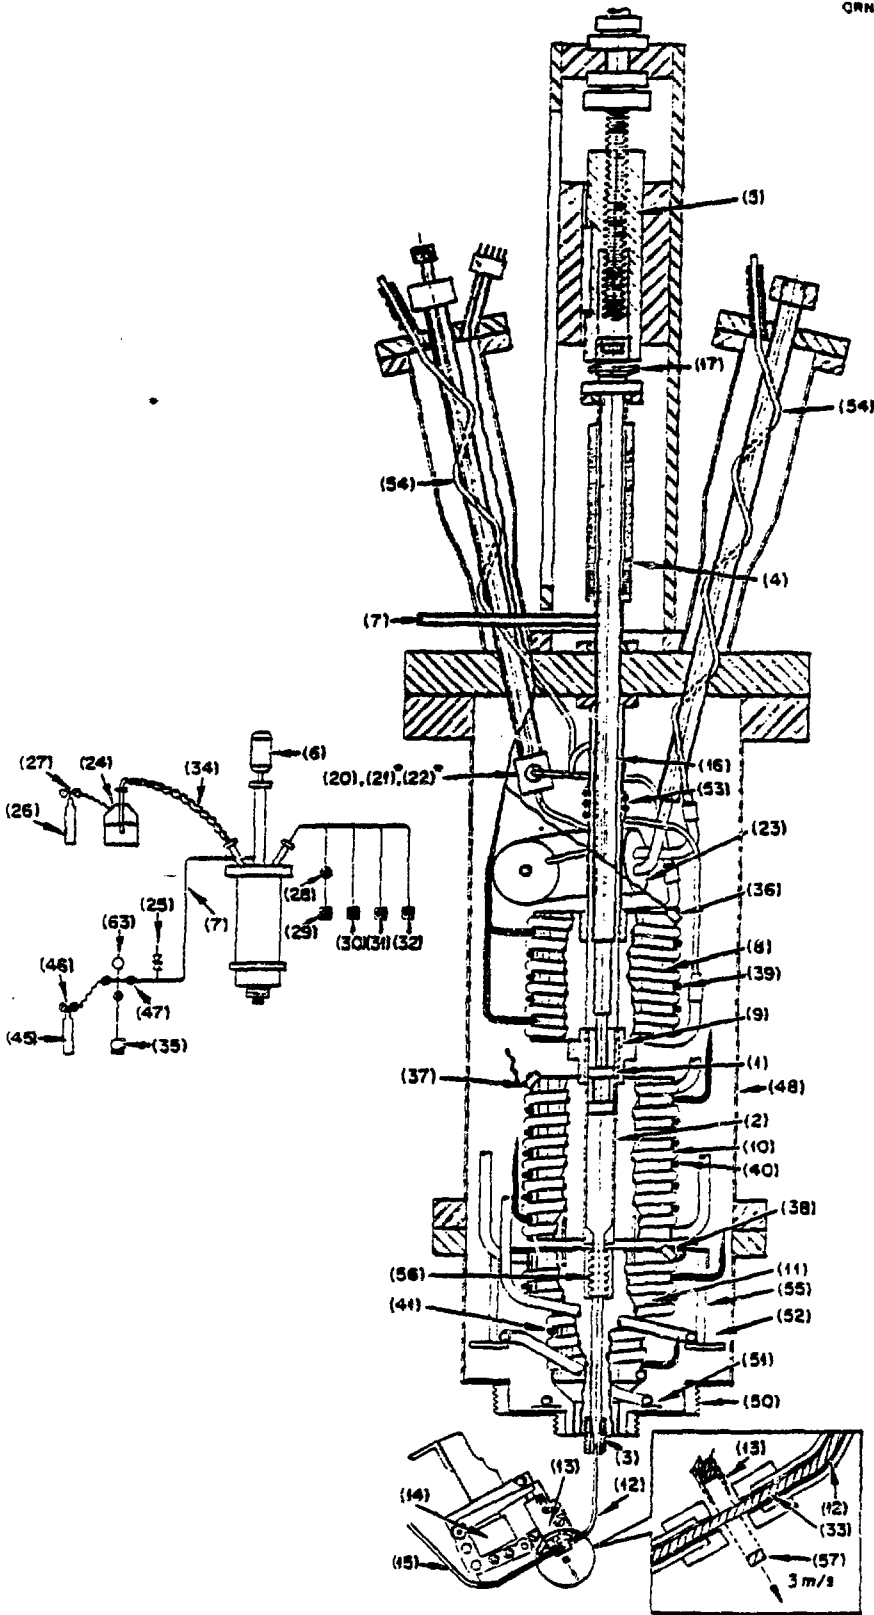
Schematic of the pellet feed mechanism. (1) Extruder piston. (2) Brass cylinder. (3) 1.3-mm-diam nozzle. (4) Bellows. (5) Screw press. (6) Motor. (7) Deuterium gas inlet tube. (8) First heat exchanger. (9) Deuterium gas inlet ports. (10) Second heat exchanger. (11) Third heat exchanger. (12) Filament guide tube. (13) Razor-knife hammer punch. (14) Solenoid. (15) Filament removal tube. (16) Stainless steel tube. (17) Force washer. (20)-(22) Needle valves. (23) Phase separator. (24) Helium storage dewar. (25) Relief valve. (26) Helium storage cylinder. (27) Pressure regulator. (28) Needle valve. (29) Solenoid shutoff valve for exhaust gas from (23). (30)-(32) Solenoid shutoff valves for exhaust gas from heat exchangers. (33) Extruded filament. (34) Flexible transfer line. (35) Potary pump. (36)-(38) Silicon diode thermometers. (39)-(41) Nichrome heater wires. (45) Deuterium storage cylinder. (46) Regulator. (47) Deuterium metering valve. (48) Vacuum jacket. (50) Bellows assembly. (51)-(54) Points where exhaust gas intercepts heat. (55) Spider mechanism. (56) Electroformed bellows. (57) Pellet. (63) Bourdon vacuum gage.
